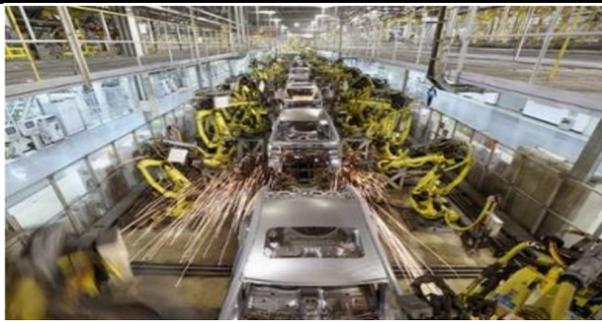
Welding robots in GWM plant (Source: engadget.com)
